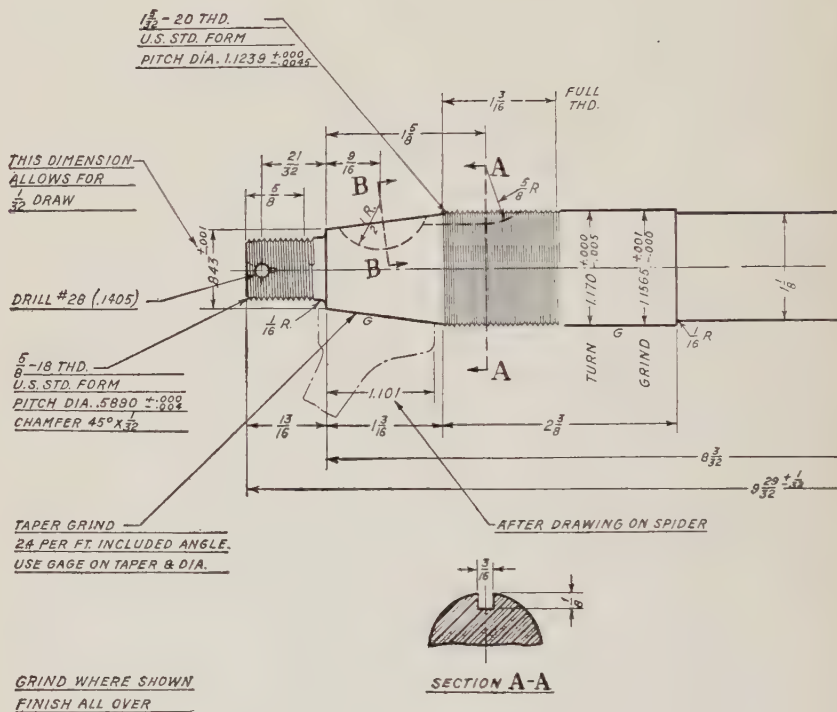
is a detailed drawing of an axle drive pinion shaft. Note that everything is shown in detail on the drawing. Each change in the original drawing as it becomes necessary is recorded at the top of the drawing. The bill of material, etc., is at the bottom right. Notes of instruction are at the bottom left. Particularly note that there is an allowable variation specified for every dimension given. This allowable variation is given either directly on the drawing or cared for in a note at the bottom left corner of the drawing.
